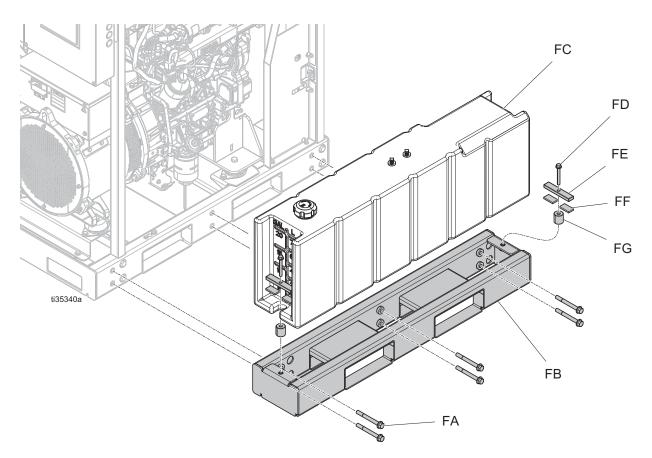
Install Fuel Tank and Fuel Tank Pallet Extension
